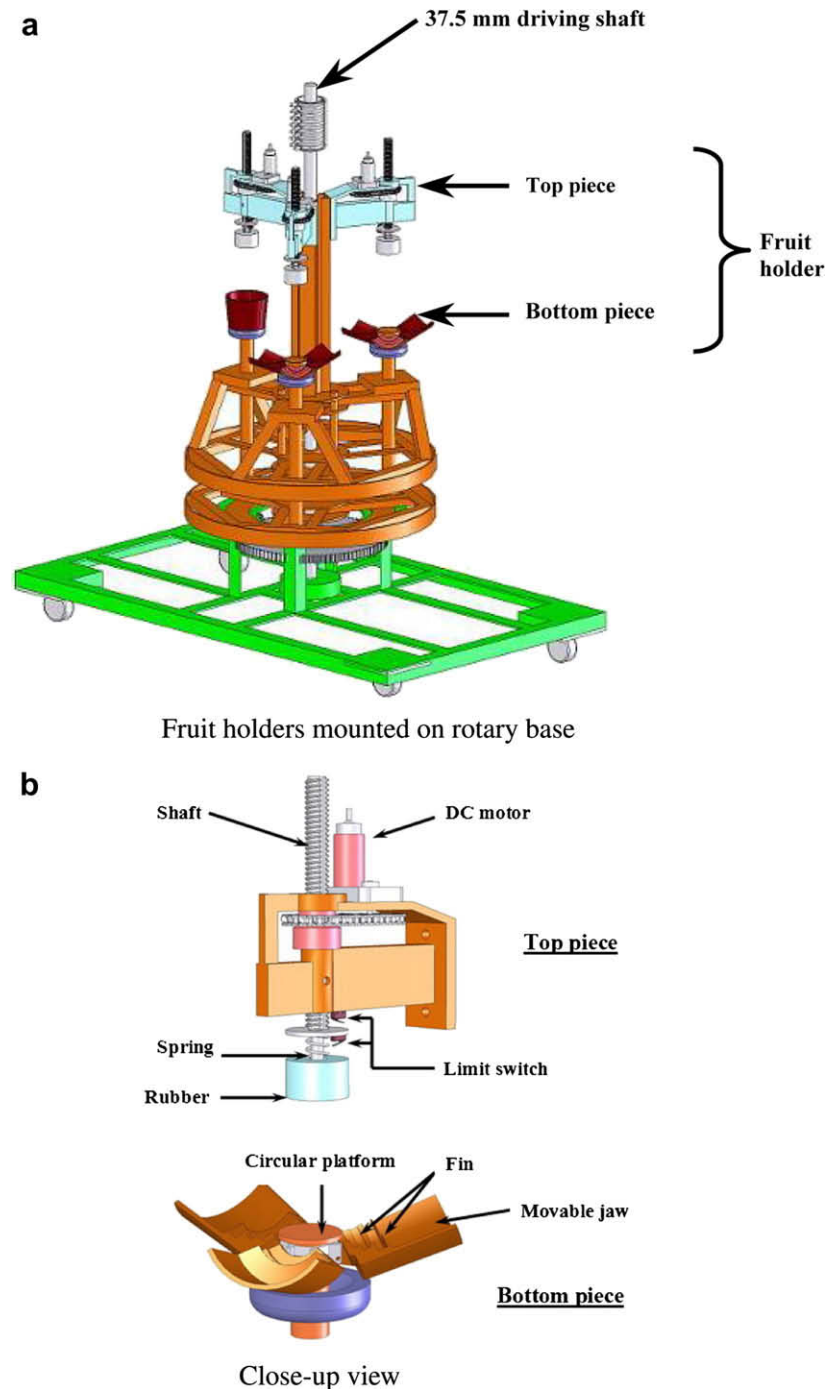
Rotary base with fruit holders. (a) Fruit holders mounted on rotary base and (b) close-up view.
